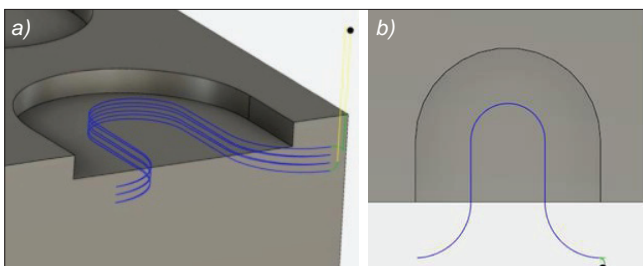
Tool path in the third machining strategy: a) isometric view, b) top view
